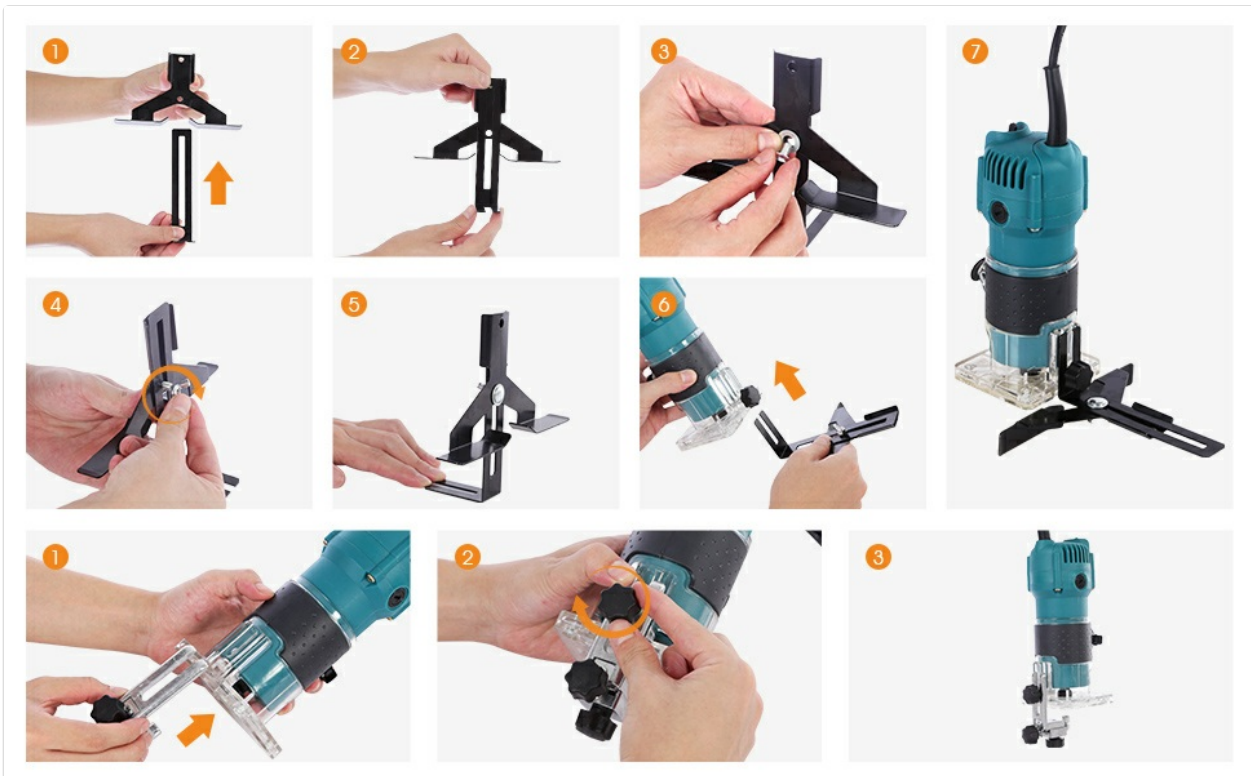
Visual instructions for assembling and attaching the linear auxiliary guide ruler and the trimming guide wheel to the router base.
